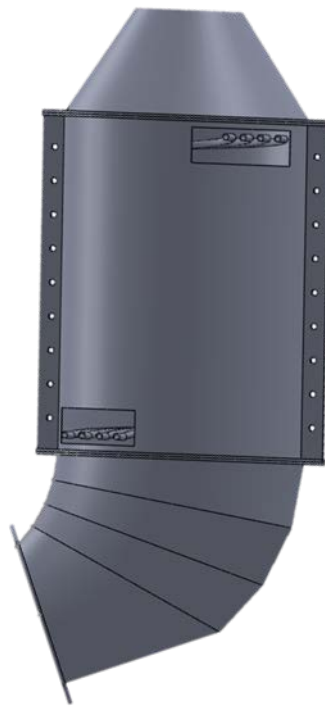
Assembled Model of Duct with Heat Exchanger Coils
